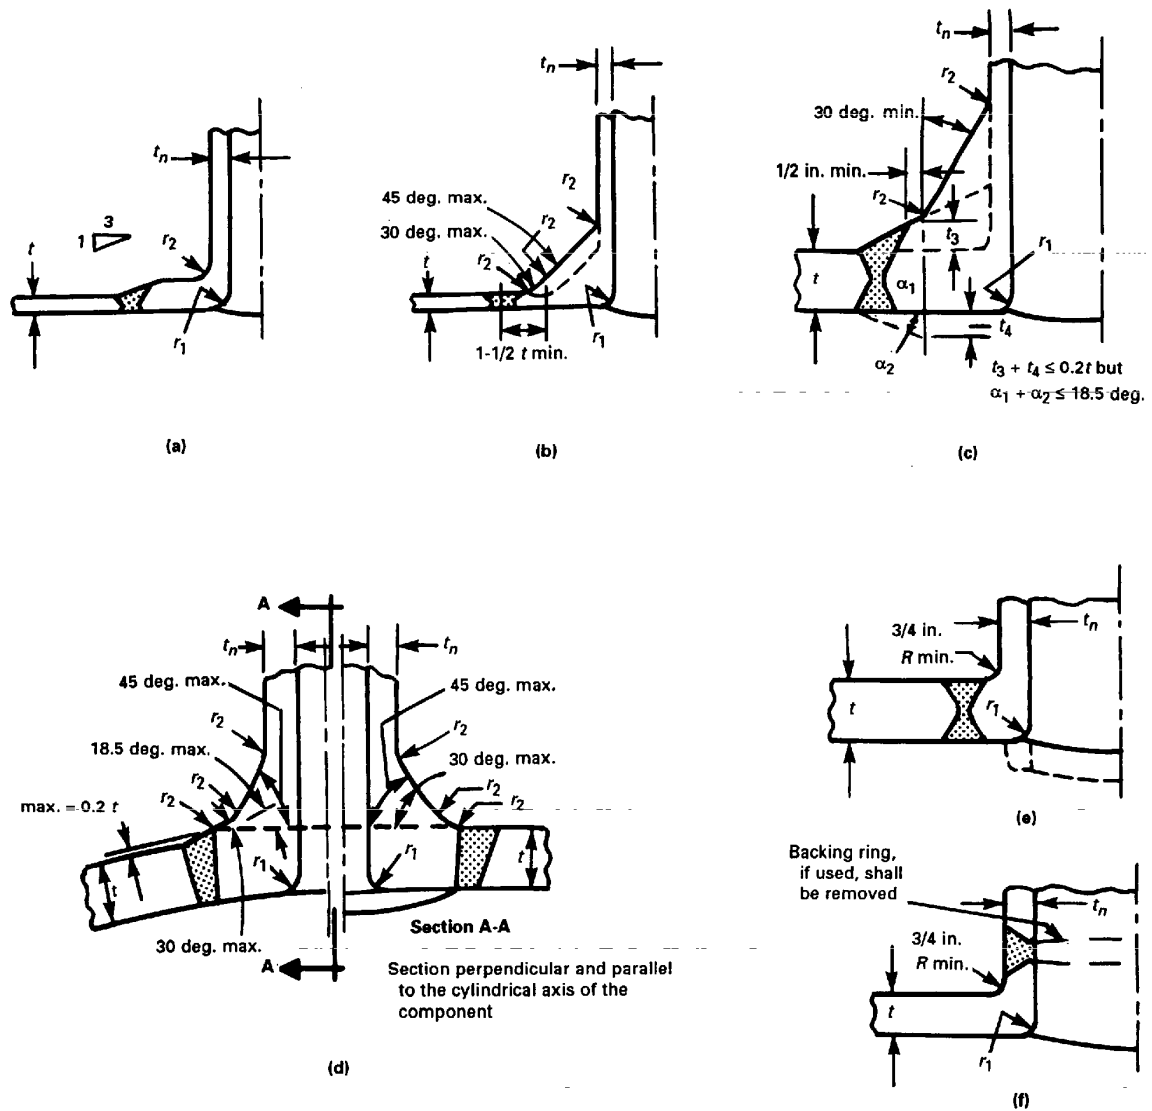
ACCEPTABLE FULL PENETRATION WELD DETAILS FOR CATEGORY C JOINTS (WB-3342.3)
